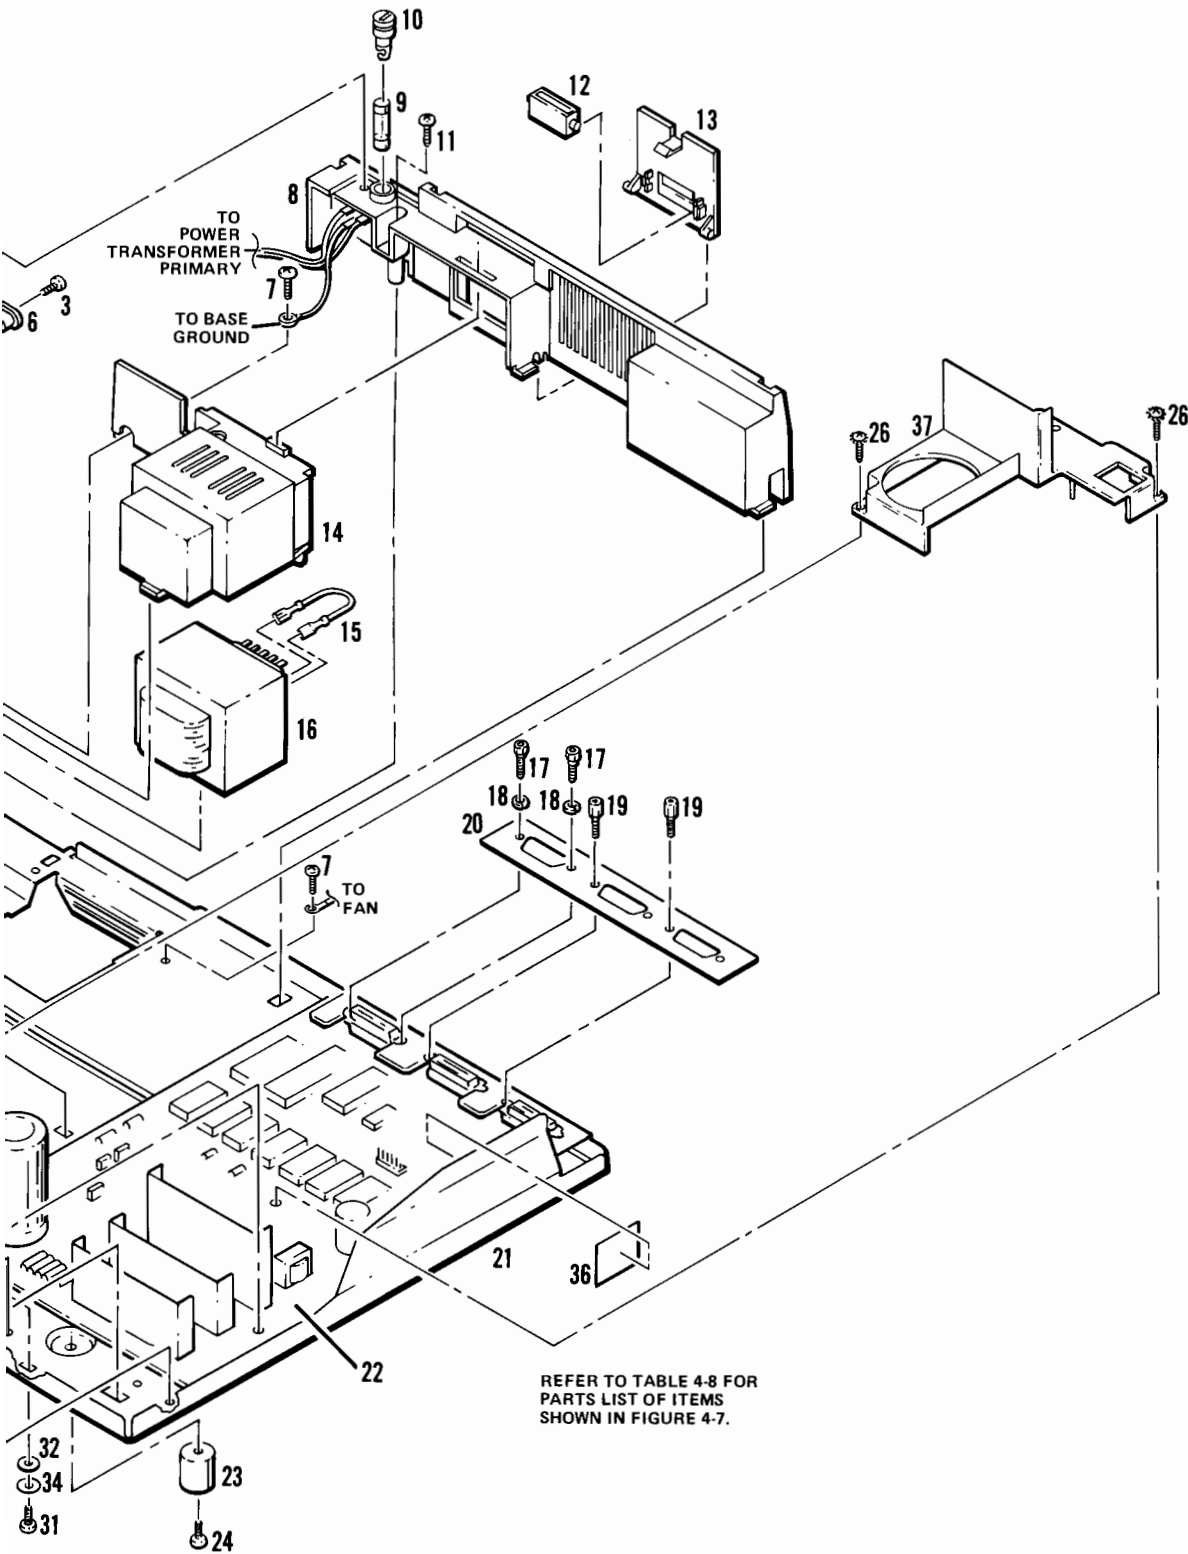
Top Cover, Base, and Power Module Assemblies, Illustrated Parts Breakdown
